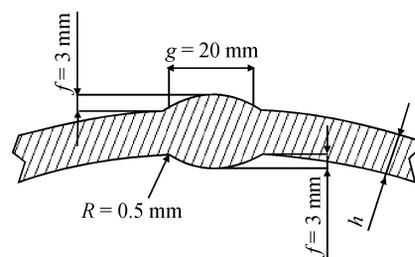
Main geometrical parameters of the weld of the design model
